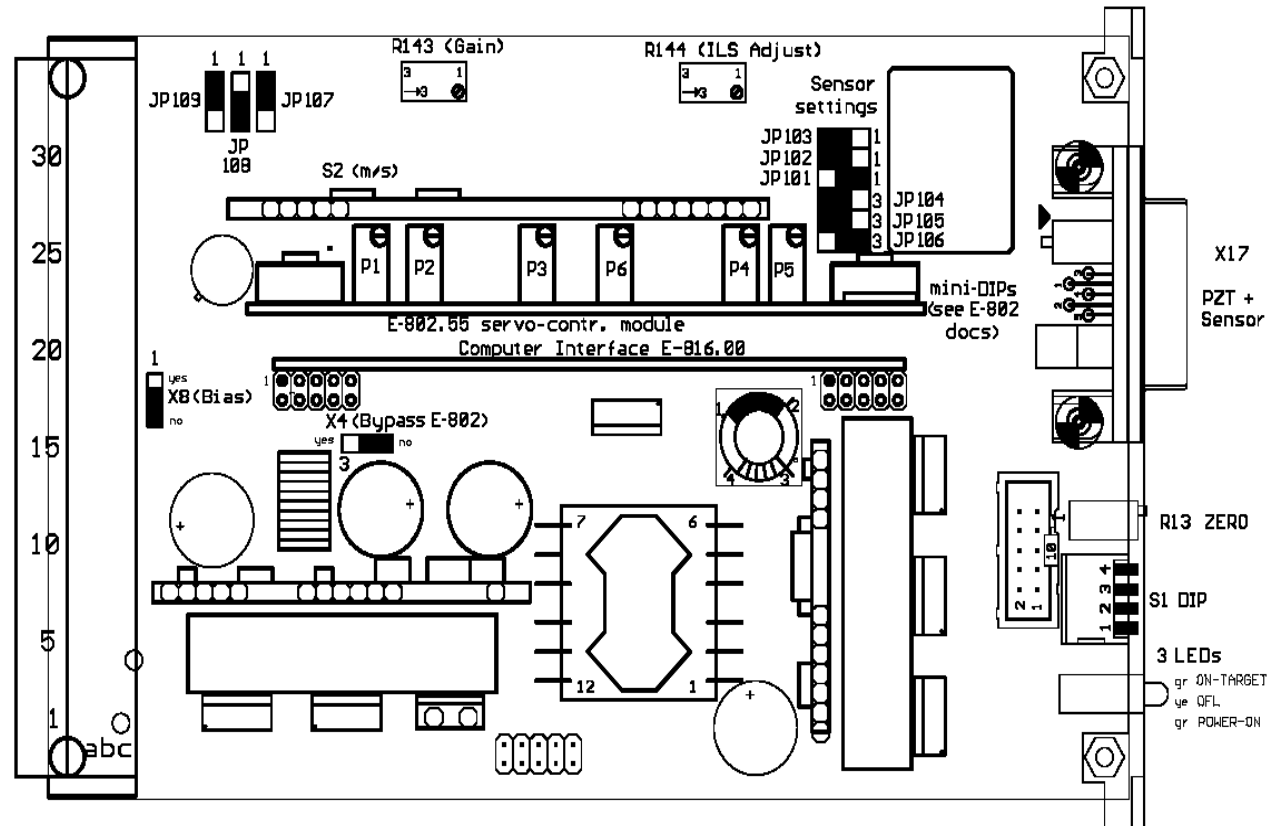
E-621.CR (viewed from component side, with bottom edge on top) component locations, adjustment elements shown in default settings; all except X4 (E-802 bypass) are accessible without removing cover plate (not shown)
